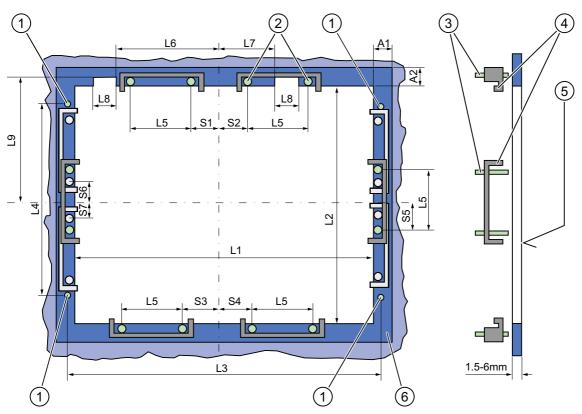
Drill holes for the screws and pressure points for the clamp screws
